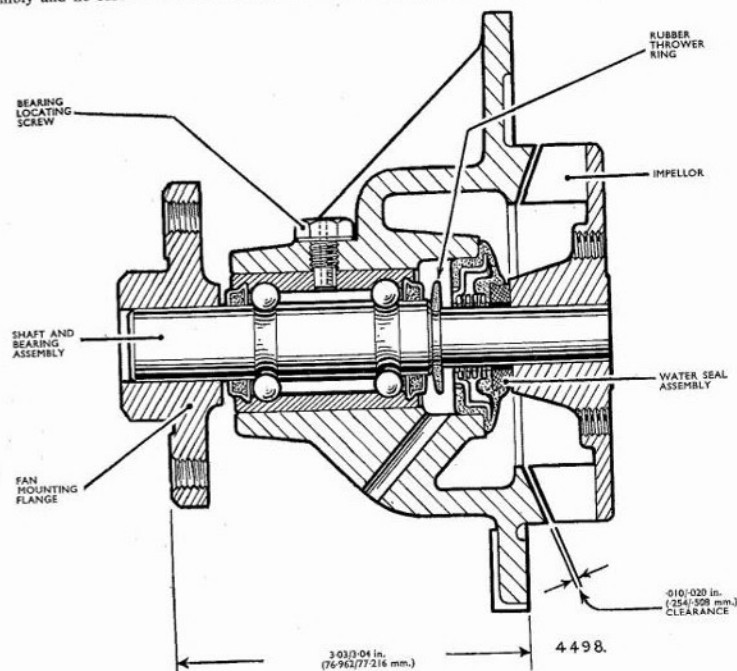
Water pump arrangement, showing the pressing dimensions
